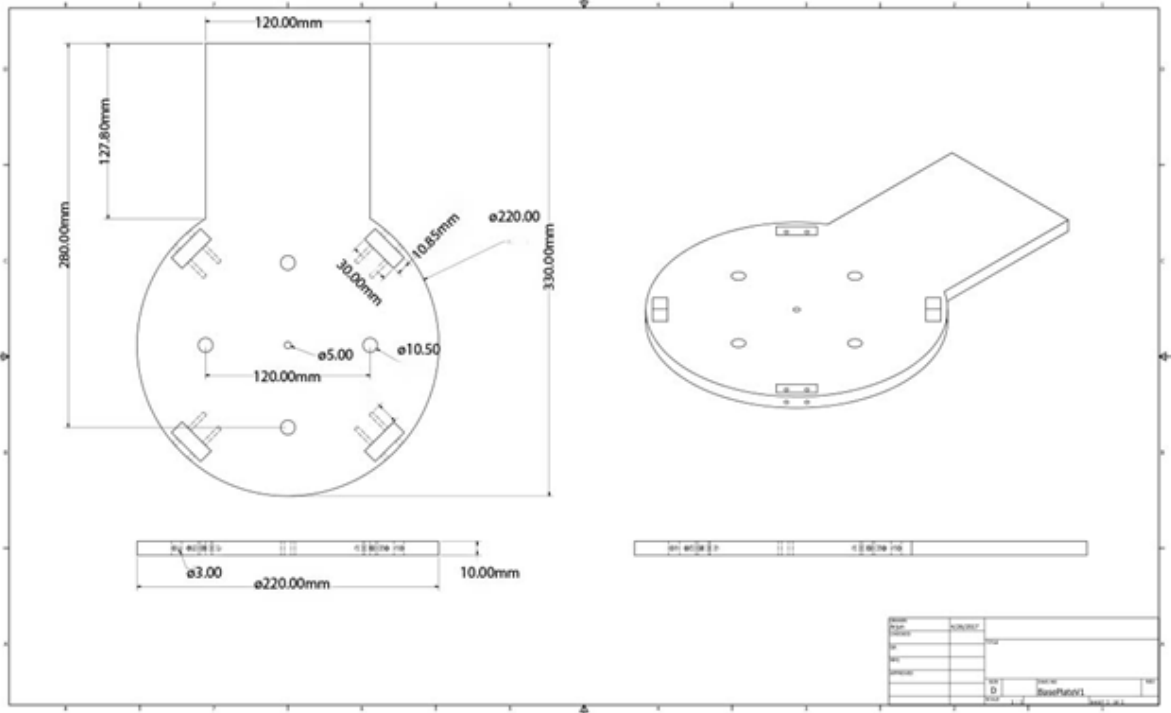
Concept base plate calibration cage design for foot and ankle testing
